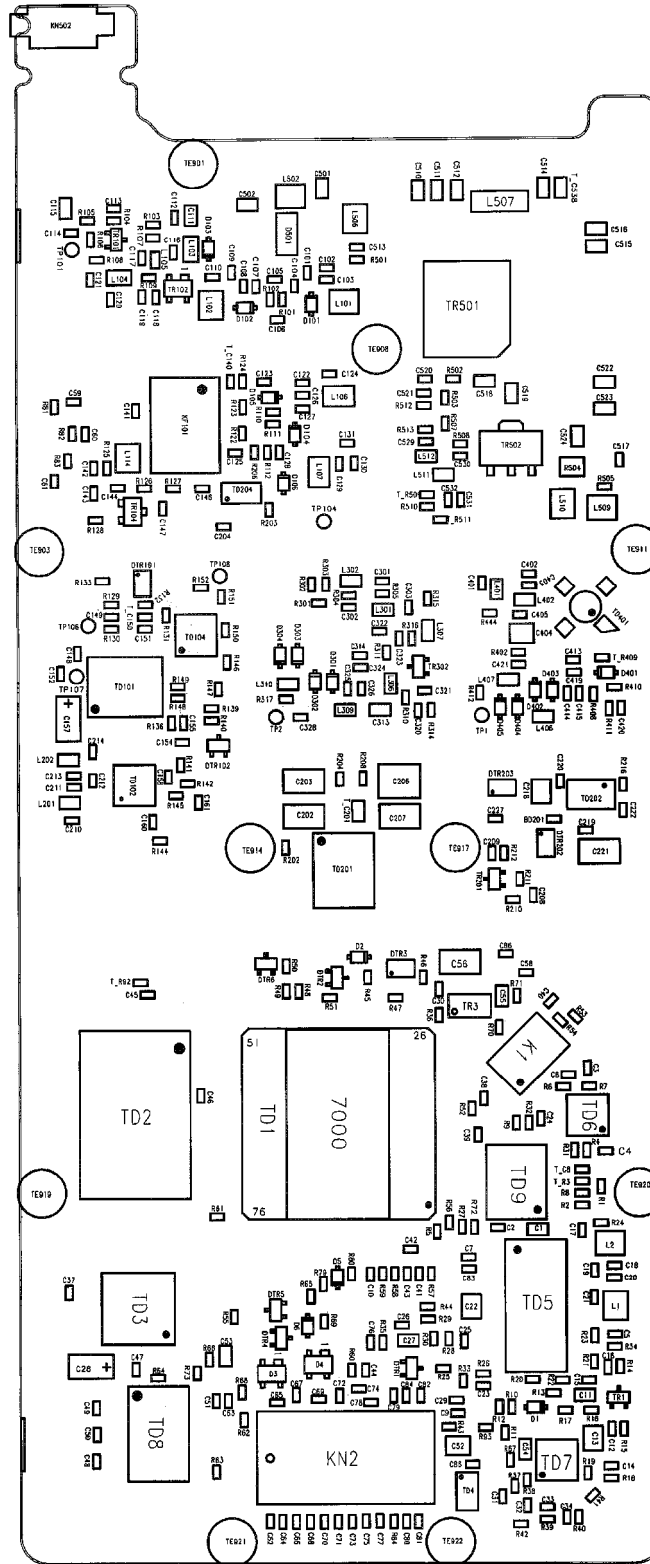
UHF RF and Control PCB Assembly Top Side
